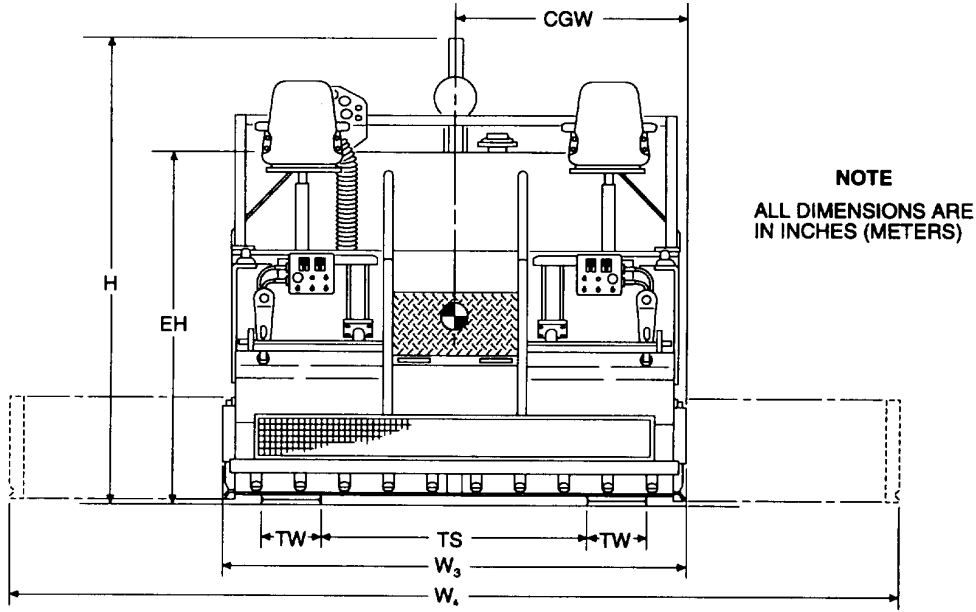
780T Paving Machine Dimensions (Sheet 1 of 2)
